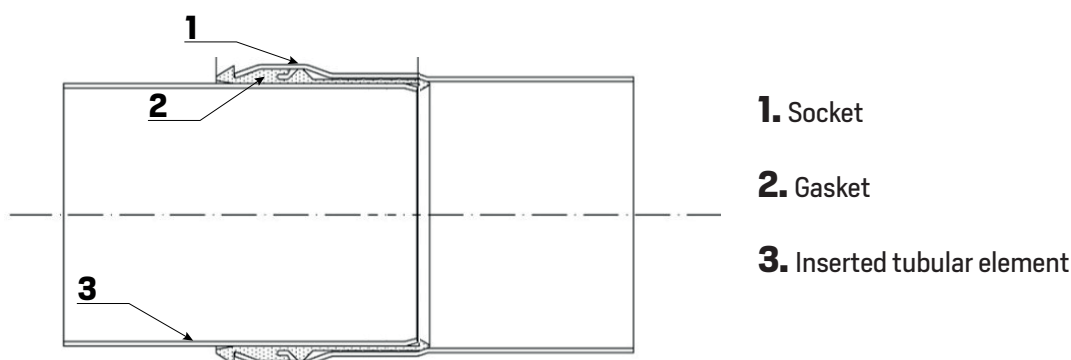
Cross-section of a fitting connected to a pipe with an interposed “high” gasket, type 826/GV
